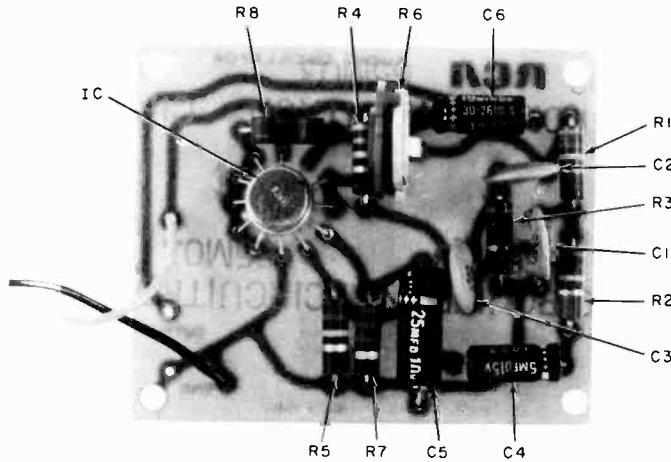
Completed circuit board showing component placement for the IC audio oscillator.
